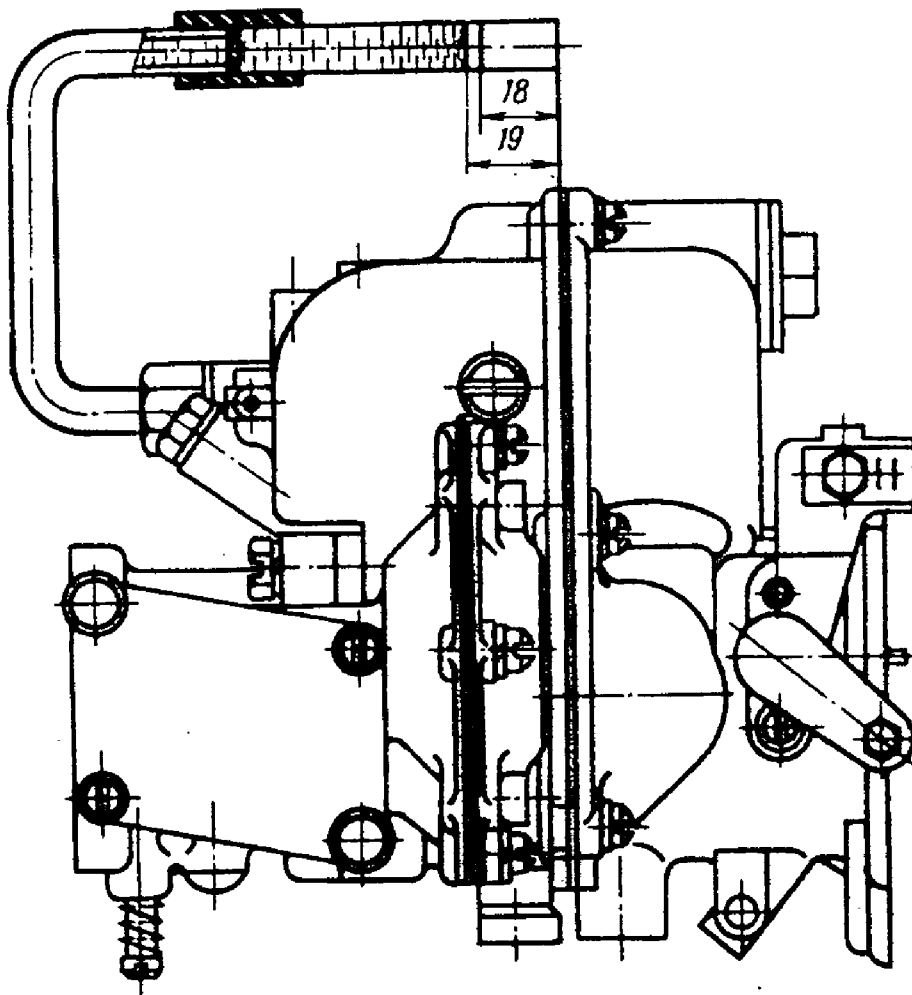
CHECKING FUEL LEVEL IN CARBURETTOR FLOAT CHAMBER WITH THE AID OF GLASS TUBE
